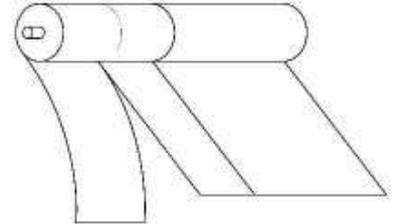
sketch of an oversized interlayer welded and cut to size
